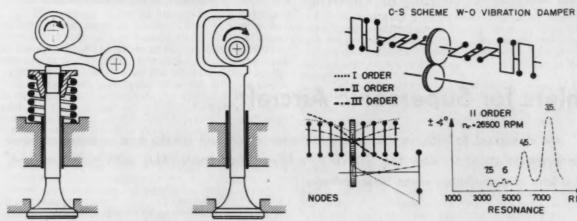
Valve actuation with (left) normal cam and (right) desmodromic gear.
